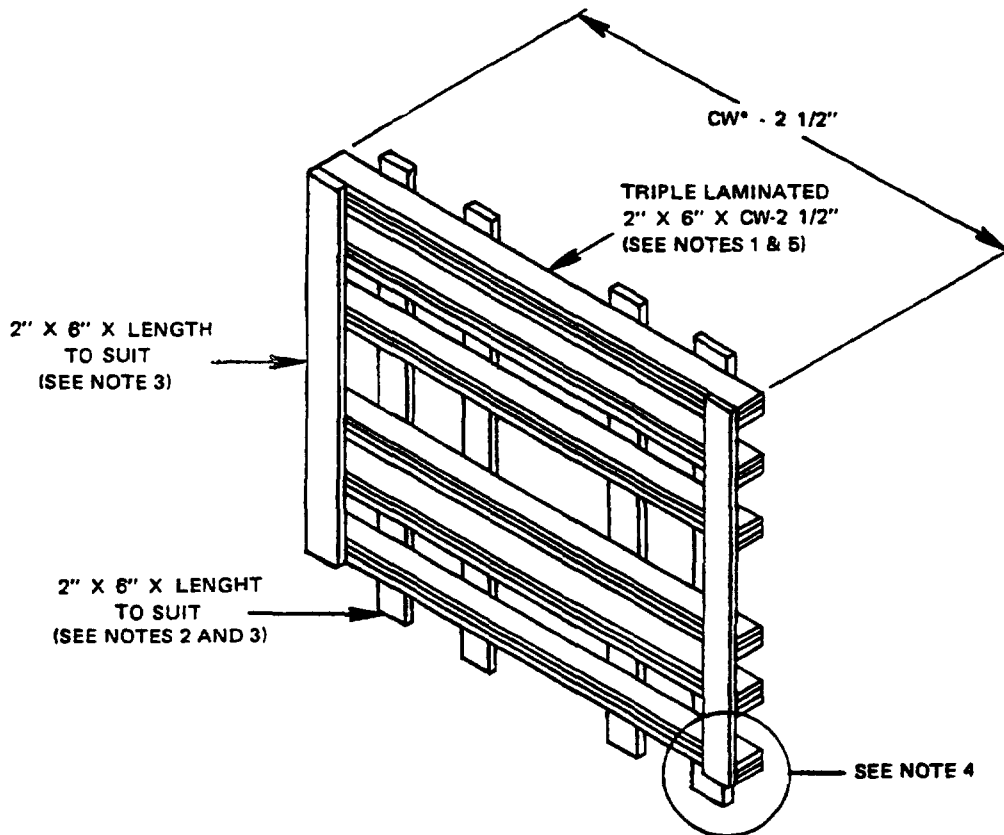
A. Typical rear bulkhead with six triple laminated beams.
